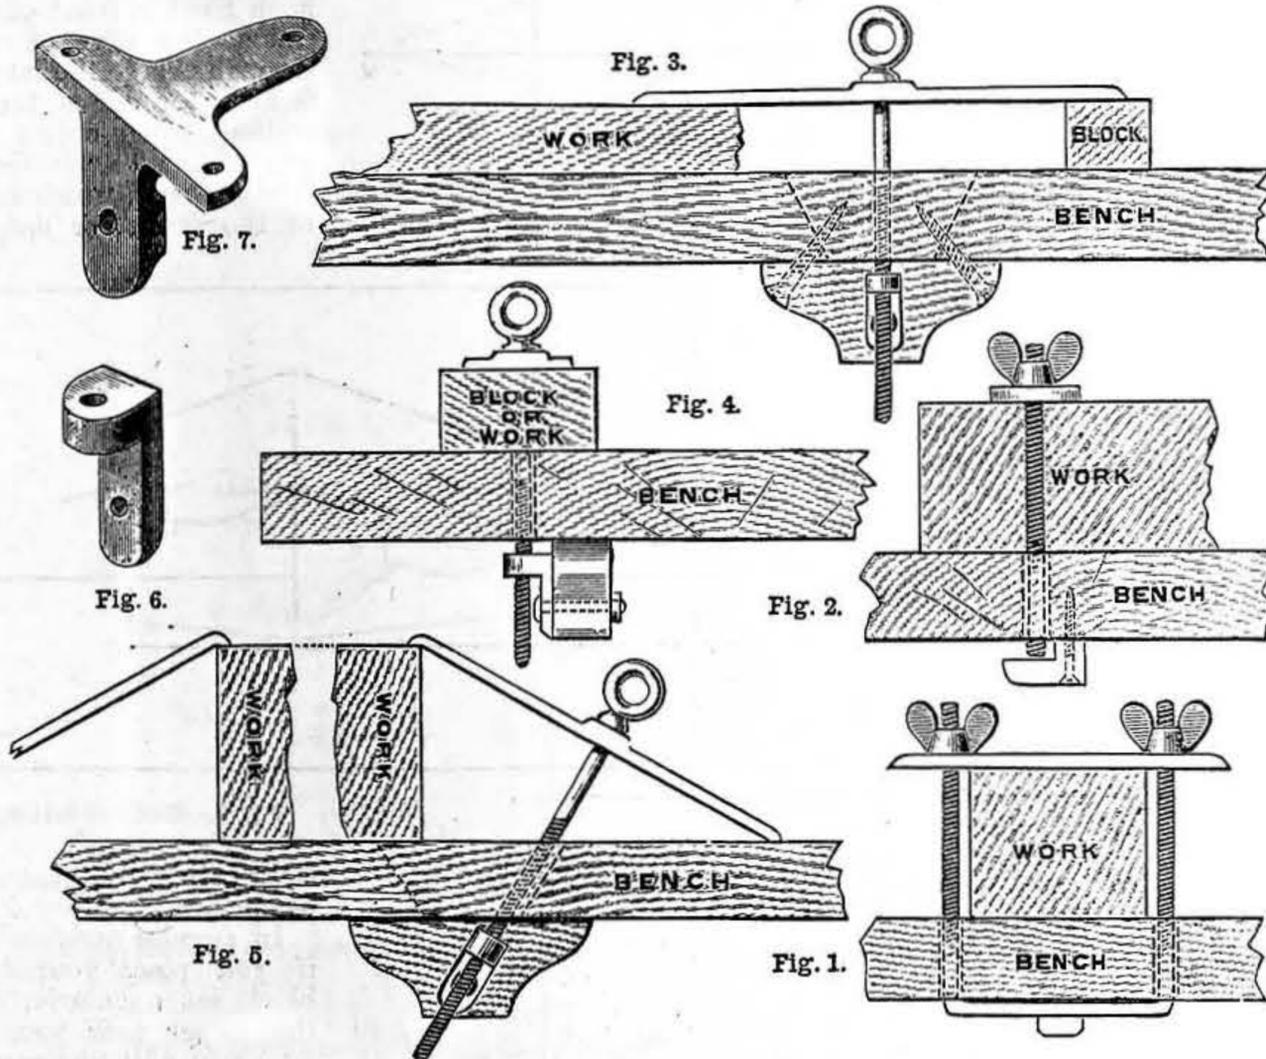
Clamp No. 1 (End Elevation). Fig. 2.—Clamp No. 1 (Side Elevation). Fig. 3.—Clamp No. 2 (Side Elevation, showing details). Fig. 4.—Clamp No. 2 (End Elevation). Fig. 5.—Clamp No. 2, showing Method of using two Clamps. Fig. 6.—Sketch of L-Piece. Fig. 7.—Suggestion for Cast Bracket. Figs. 1, 2, 3, 4, 5 are on Scale of $1\frac{1}{2}$ in. to 1 ft. Figs. 6 and 7 are not drawn to Scale.
